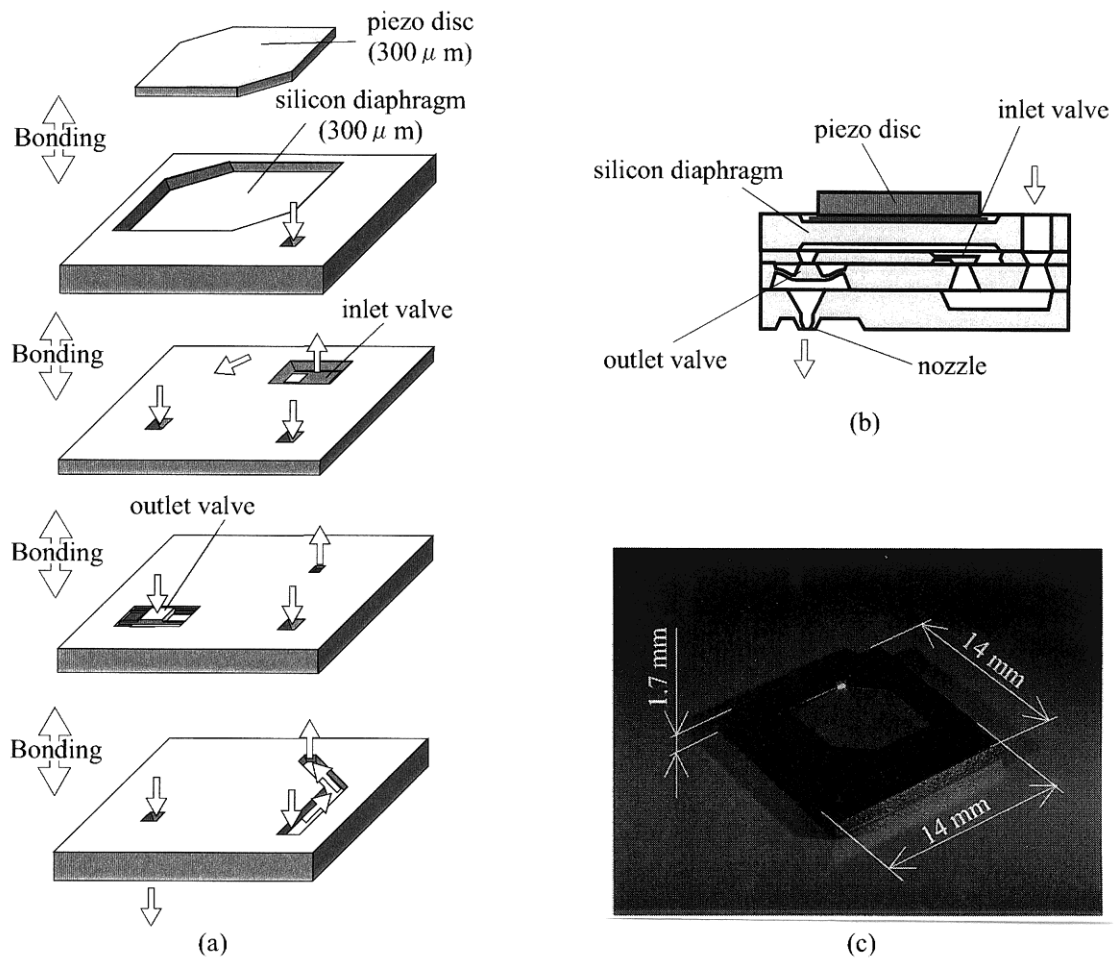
(a) Principle design, (b) crosssectional view, and photograph of micromachined dispenser
